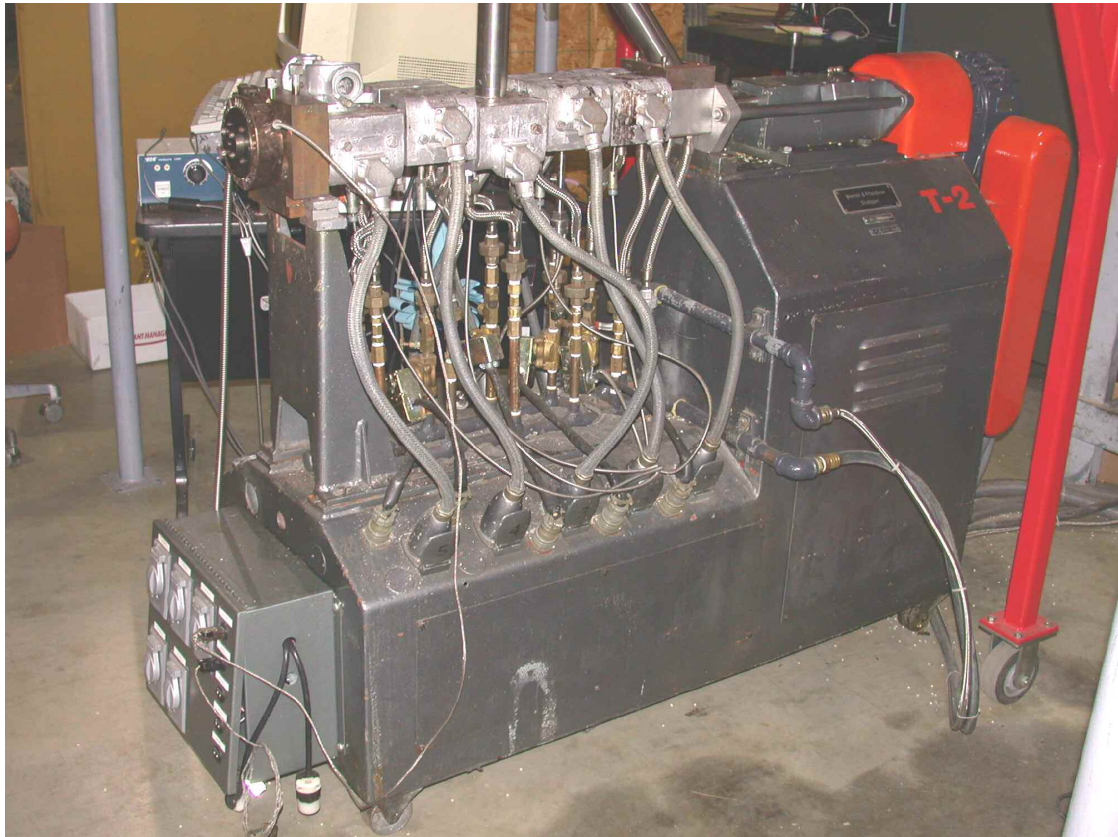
The ZDSK-28 twin-screw extruder at the University of Maryland is a laboratory-sized extruder.
